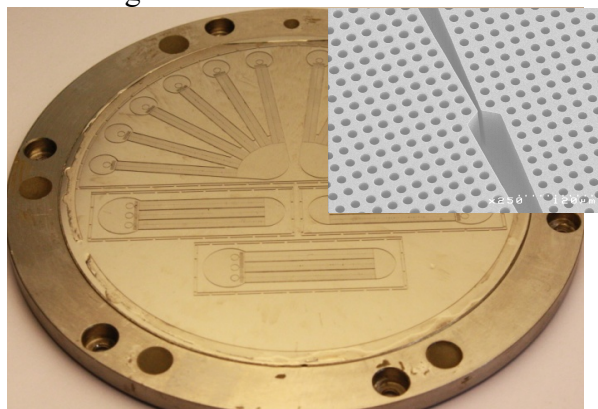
Ni mold insert with ~100 μm deep holes and ~15 μm holes ready for molding.
